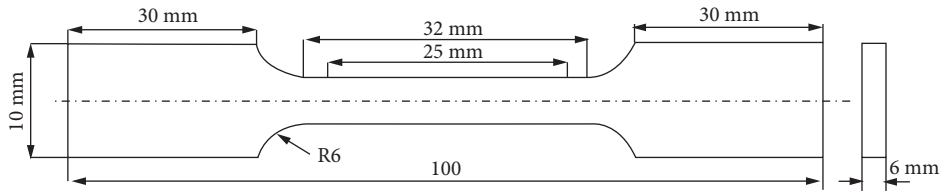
Dimensions of the tensile specimen (ASTM E8M-04).
